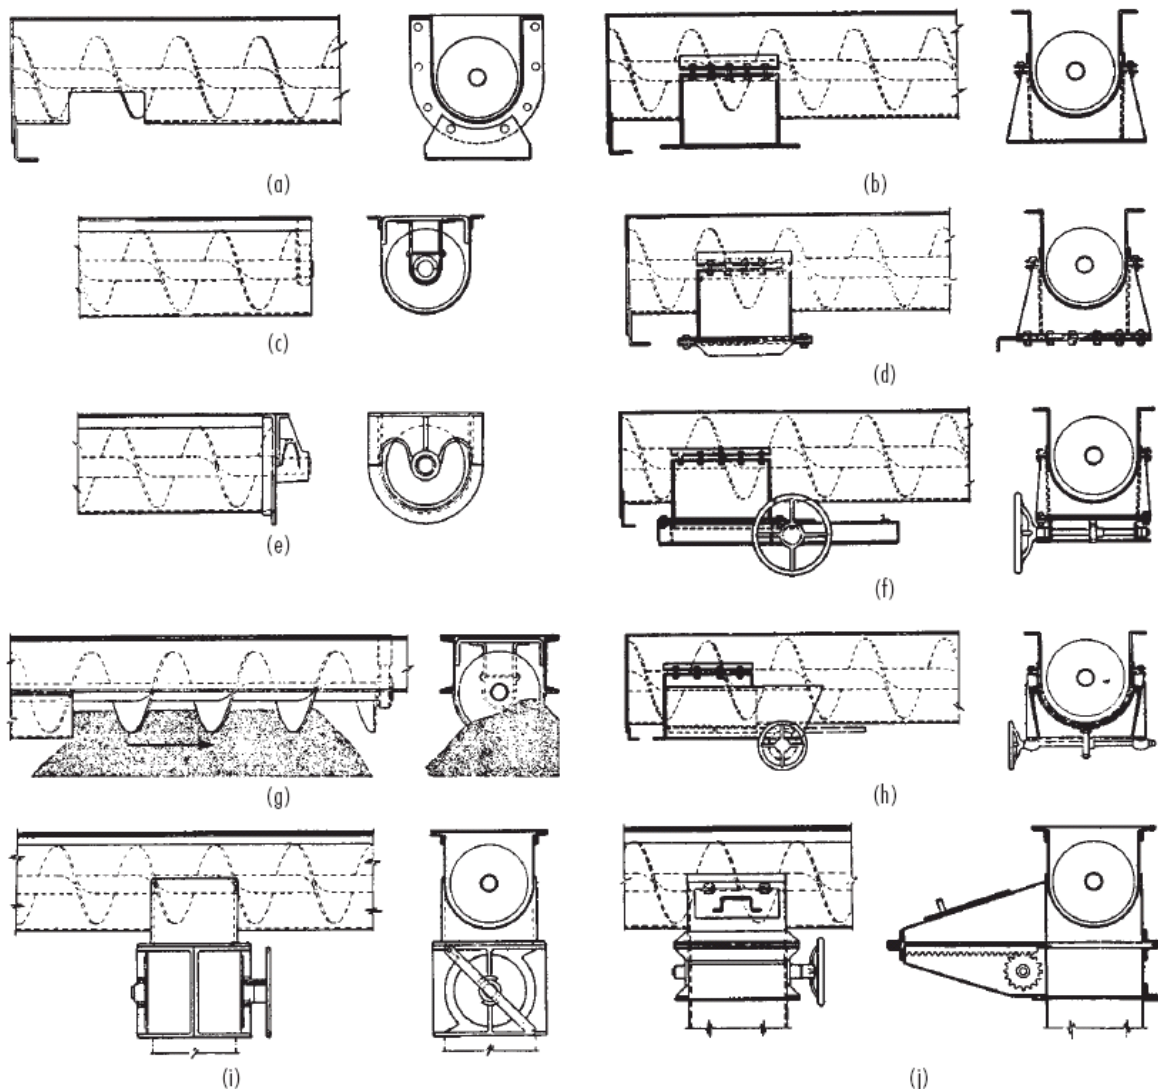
Typical discharge arrangements for screw conveyors. (a) Plain discharge opening. (b) Discharge spout. (c) Open-end trough. (d) Hand slide gate. (e) Discharge trough end. (f) Rack-and-pinion flat side gate. (g) Open-bottom trough. (h) Rack-and-pinion curved slide gate. (i) Rotary cutoff valve. (j) Enclosed rack-and-pinion gate. (FMC Corporation, Material Handling Systems Division.)
